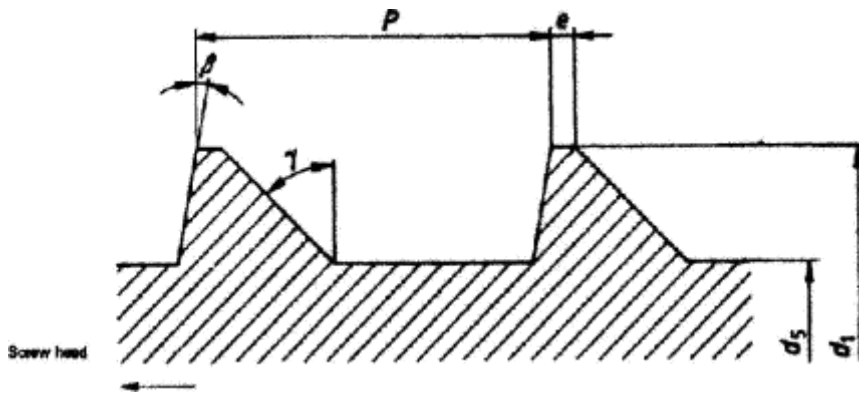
Schematic diagram of HD screw thread dimension (Table 4)
